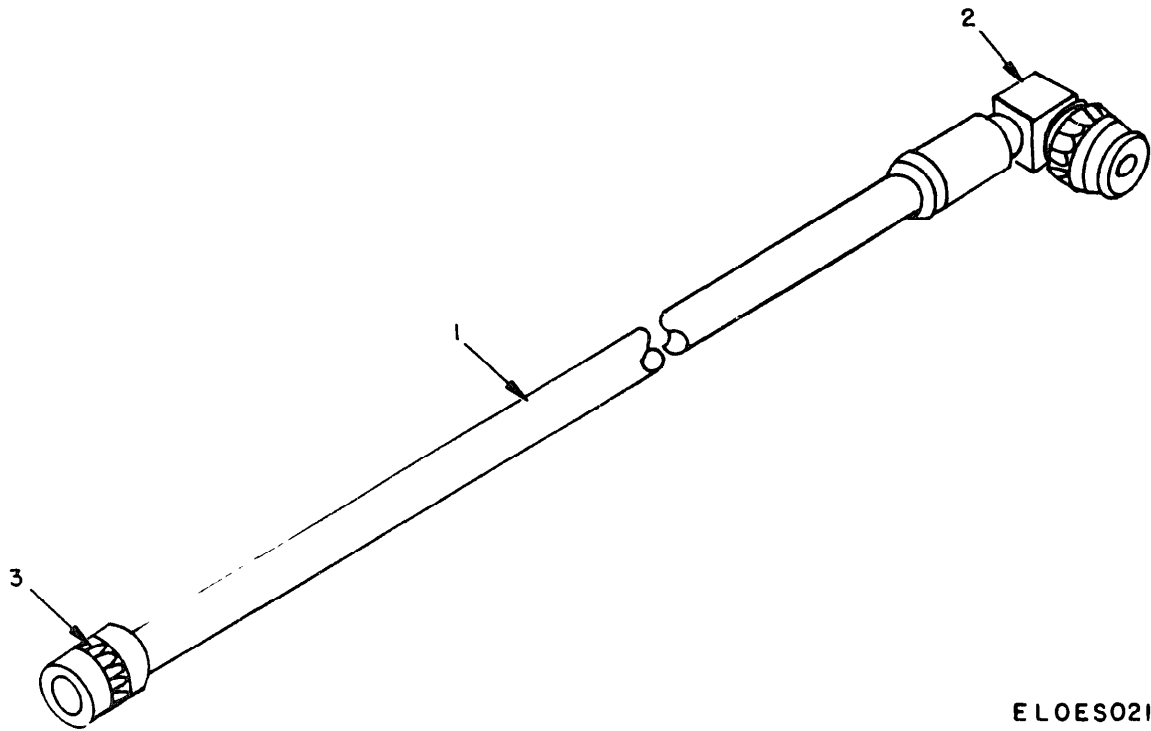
Cable Assembly, Coaxial 6460-60116-071.
